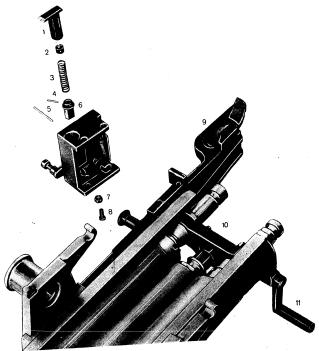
TRIGGERING PARTS CASING TRIGGERING PARIS CASING
